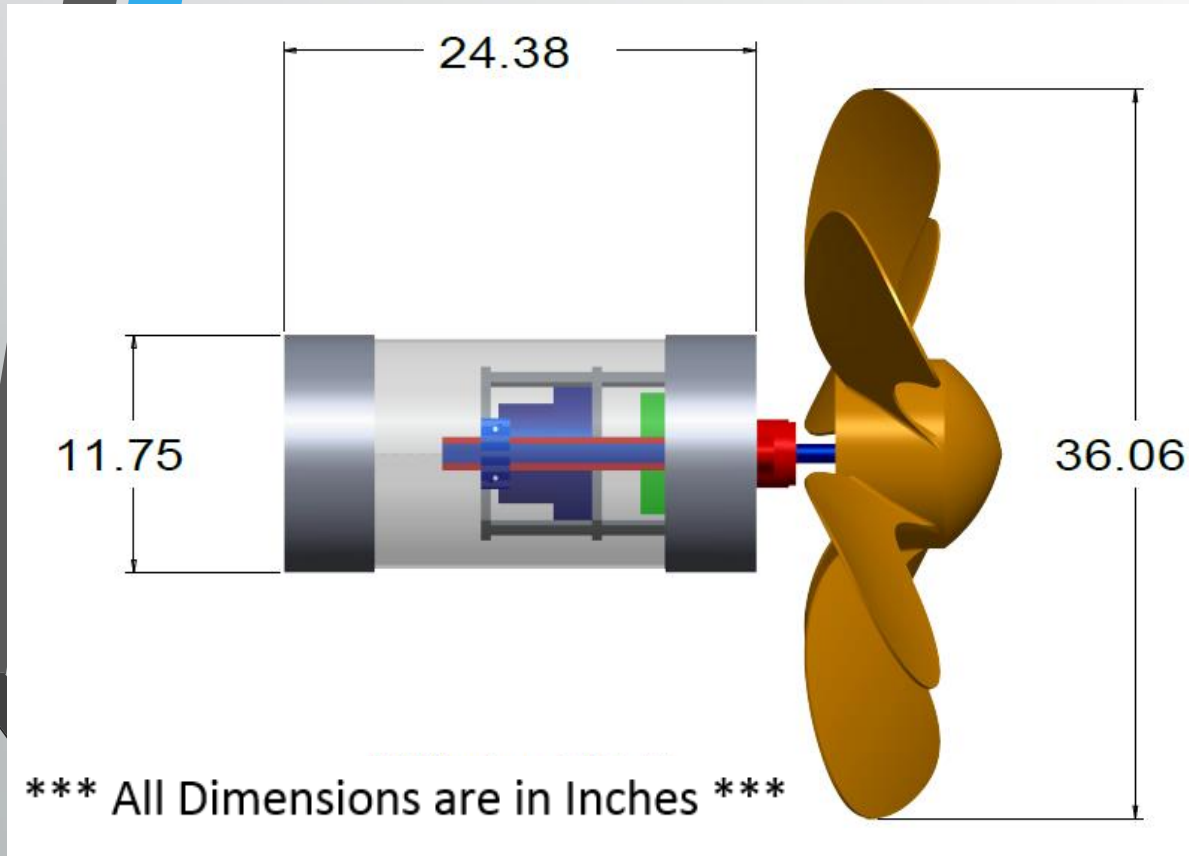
Hydroelectric Generator CAD with Dimensions Side - View
